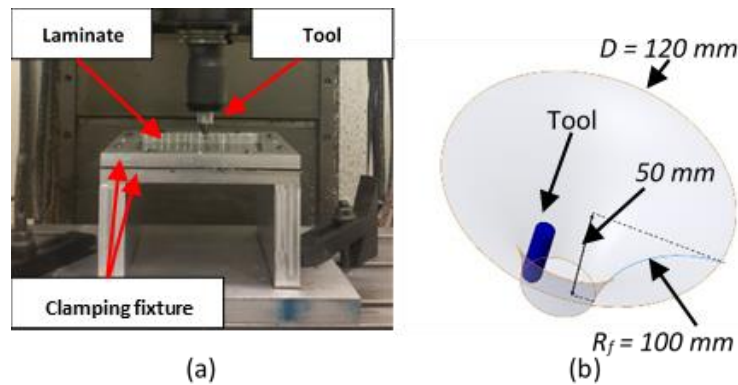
(a) SPIF setup (b) schematic of funnel part shape and tool
